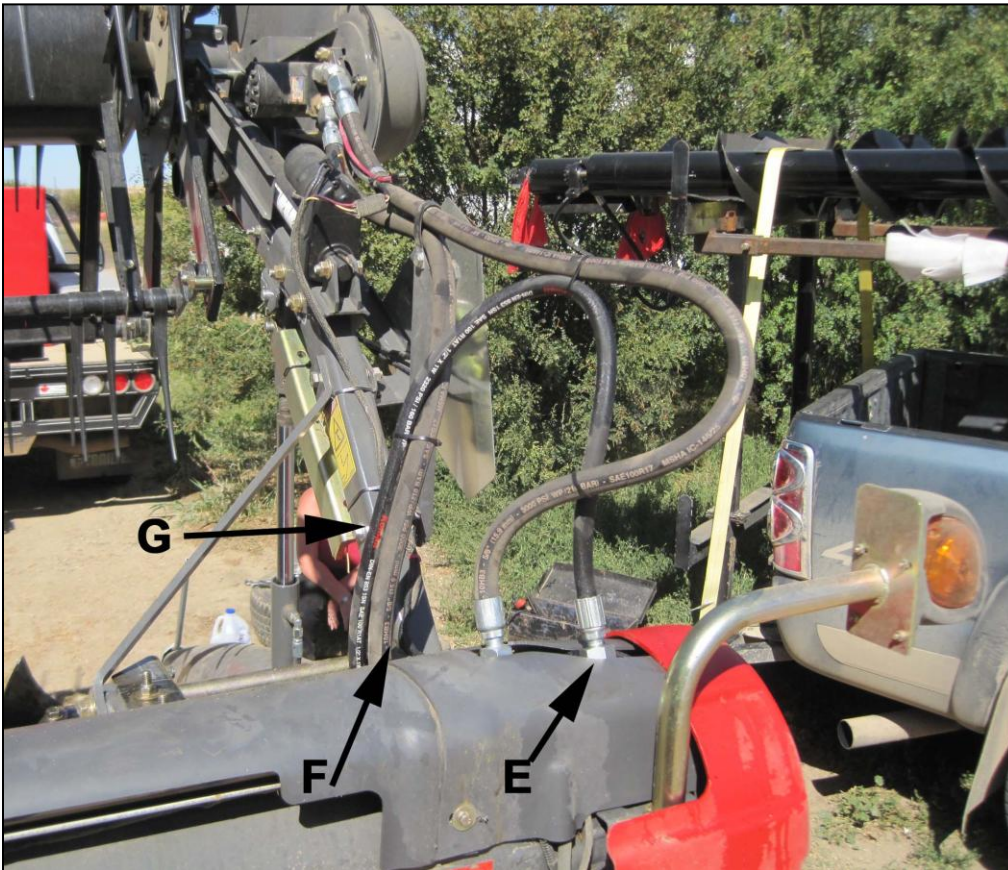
INSTALL HYD HOSES ONTO THE REEL MOTOR AND AG SHIELD MOTOR.
